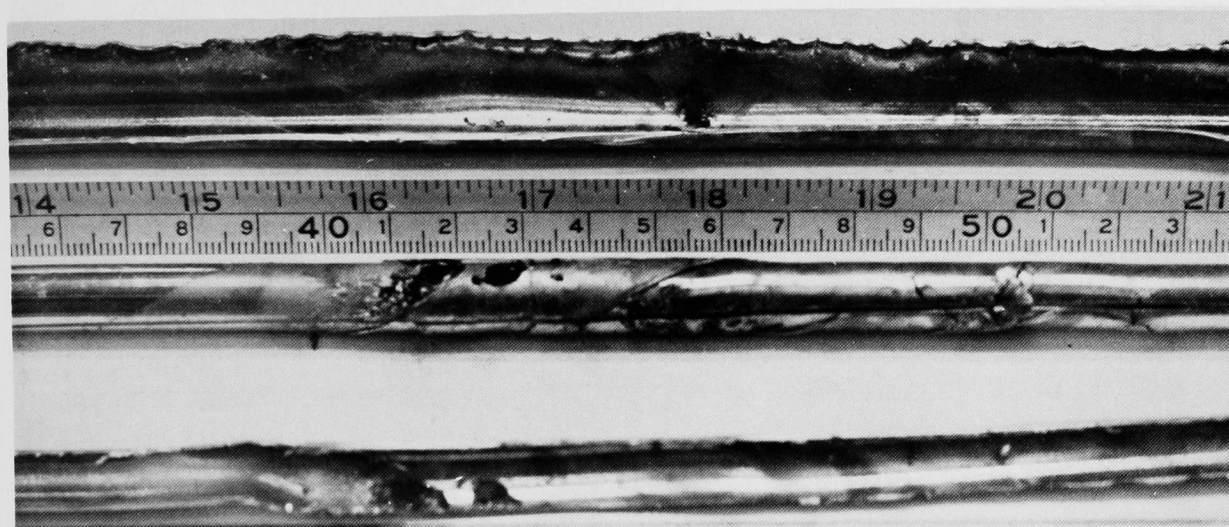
Exposed Portion of Upper Section of Inner Wall after Longitudinally Slitting Outer Wall. ANL Neg. No. 900-1158.
